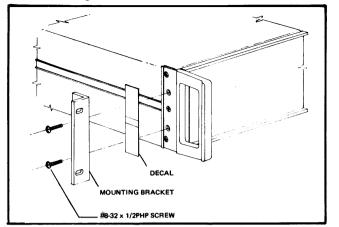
RACK MOUNTING BRACKET INSTALLATION
